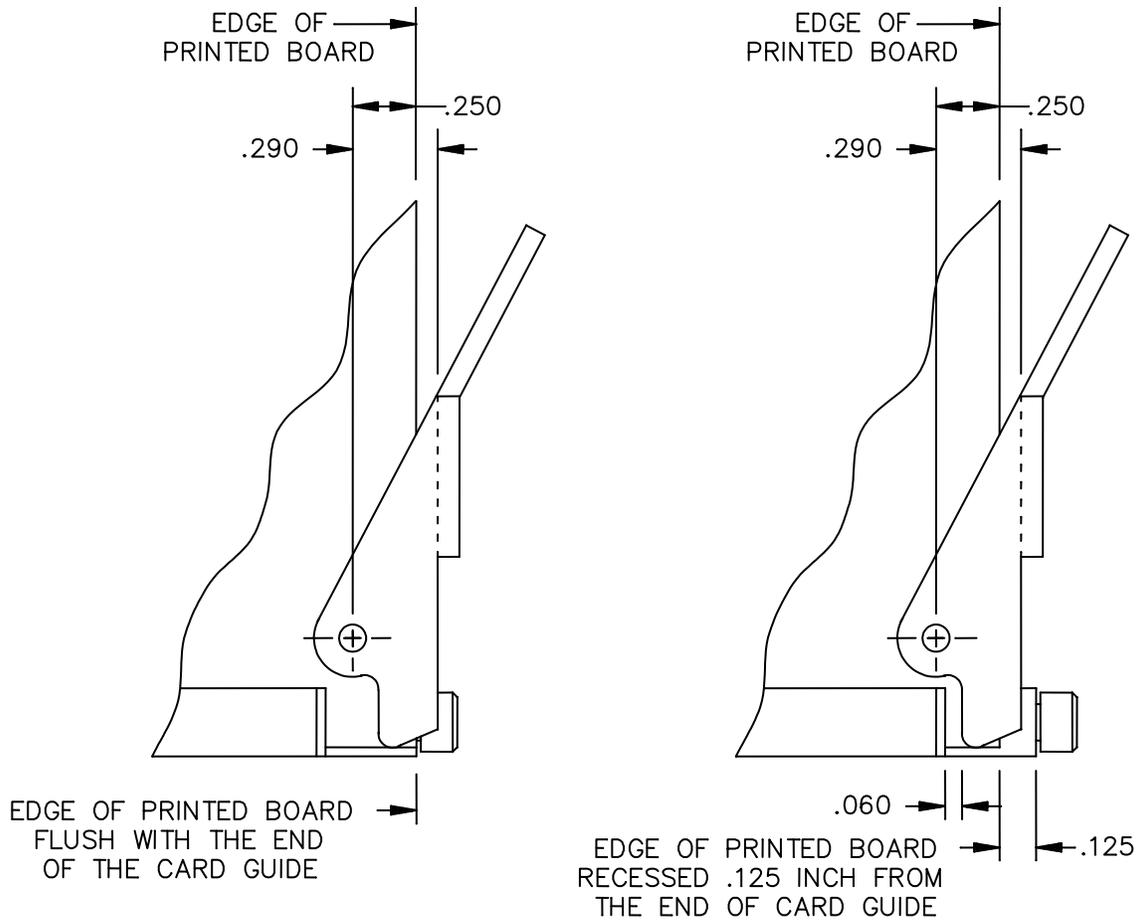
Circuit card assembly to card guide view (right hand extractor shown).
